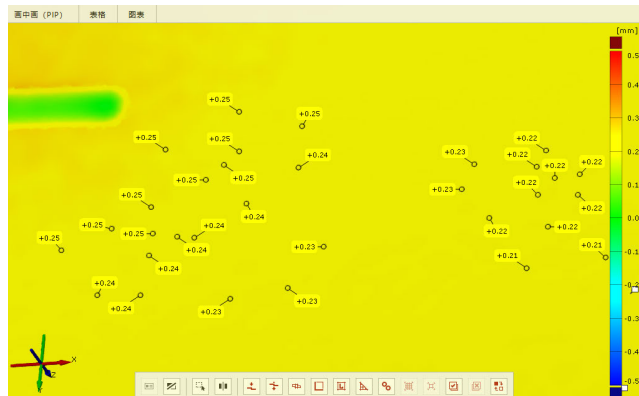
Surface inspection cloud for sheet metal parts without spray developer defects2.
